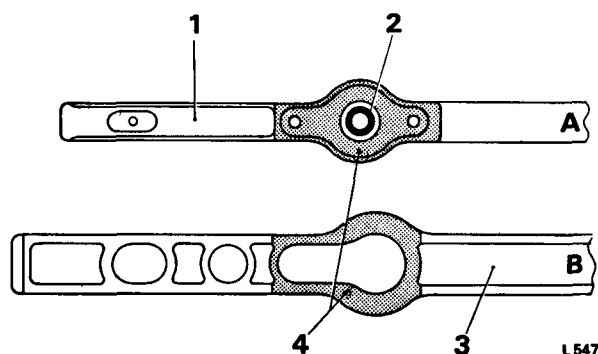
LOCATION OF SEALANT ON EXTERIOR DOOR HANDLE AND MOULDING (4-Door Saloon and Long Wheelbase Cars)
